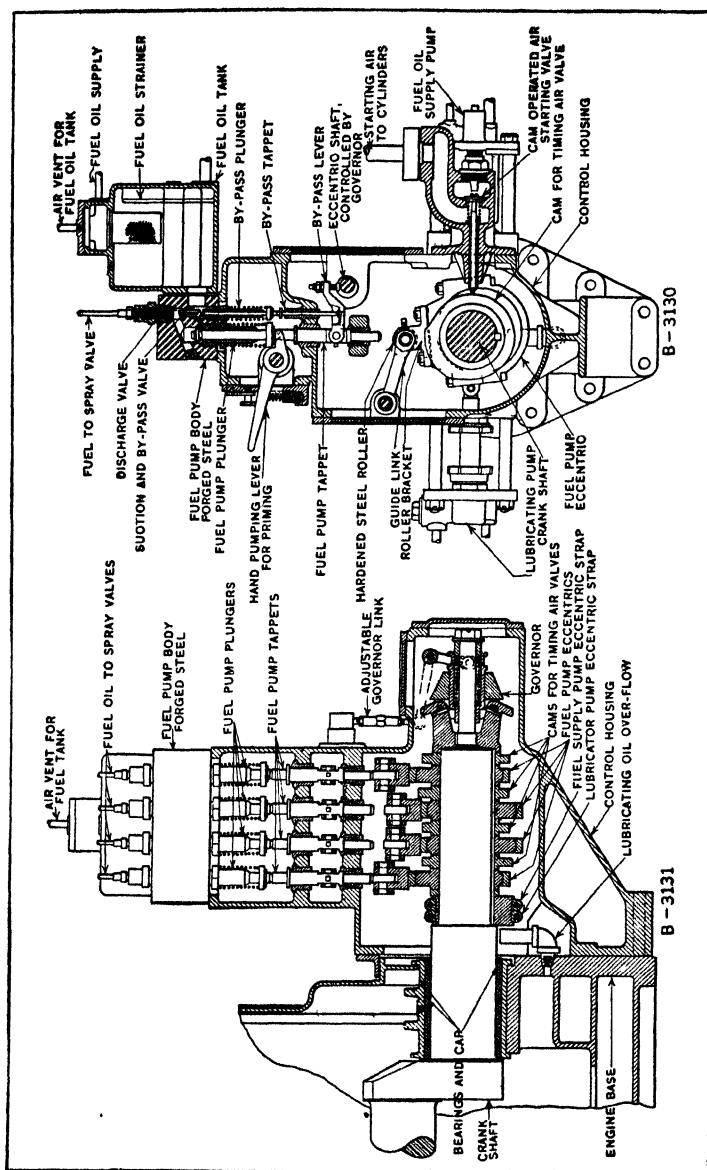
Control Box Sectional Assemblies, Air Starting, Fuel Service and Injection Pumps, Lubricating Oil Pump and Governor, Worthington Engine
